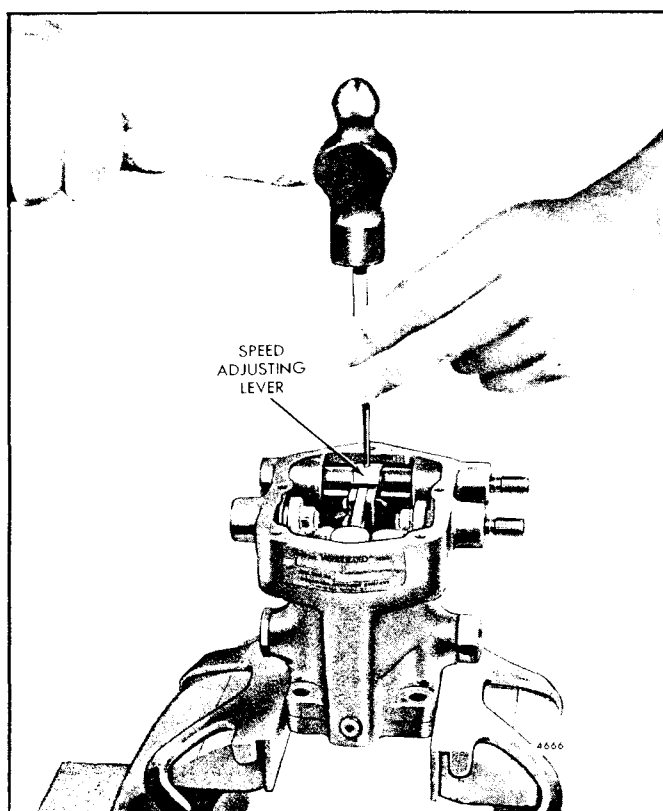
Removing Speed Adjusting Lever Roll Pin
